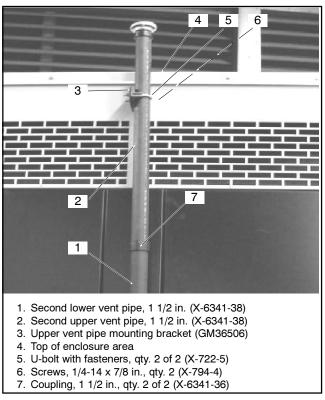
Upper and Lower Vent Pipe Assembly Typical
